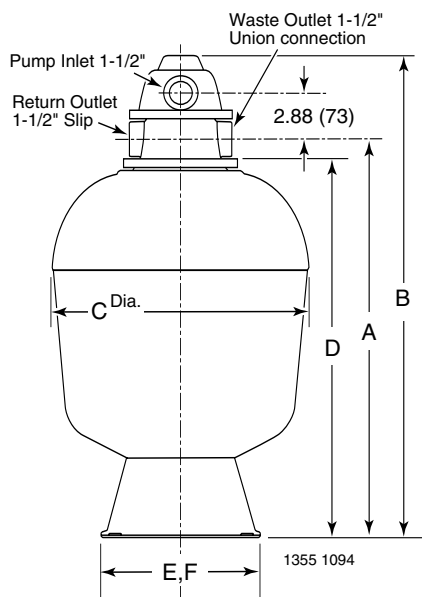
Dimensions, T-150BP-1, T-170BP-1 T-200BP-1, T240BP-1
